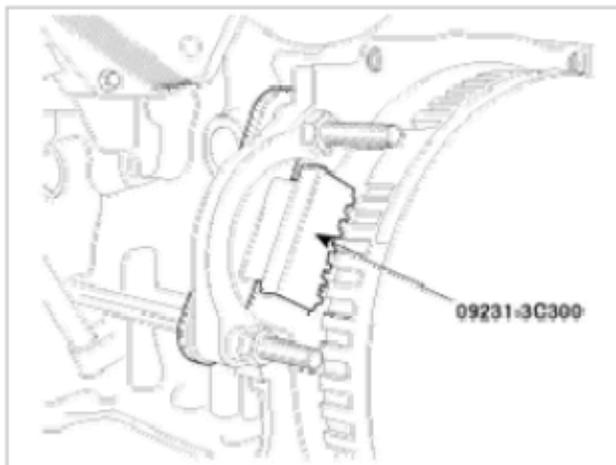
Installing SST (09231-3C300) To Hold Ring Gear After Removing Starter
